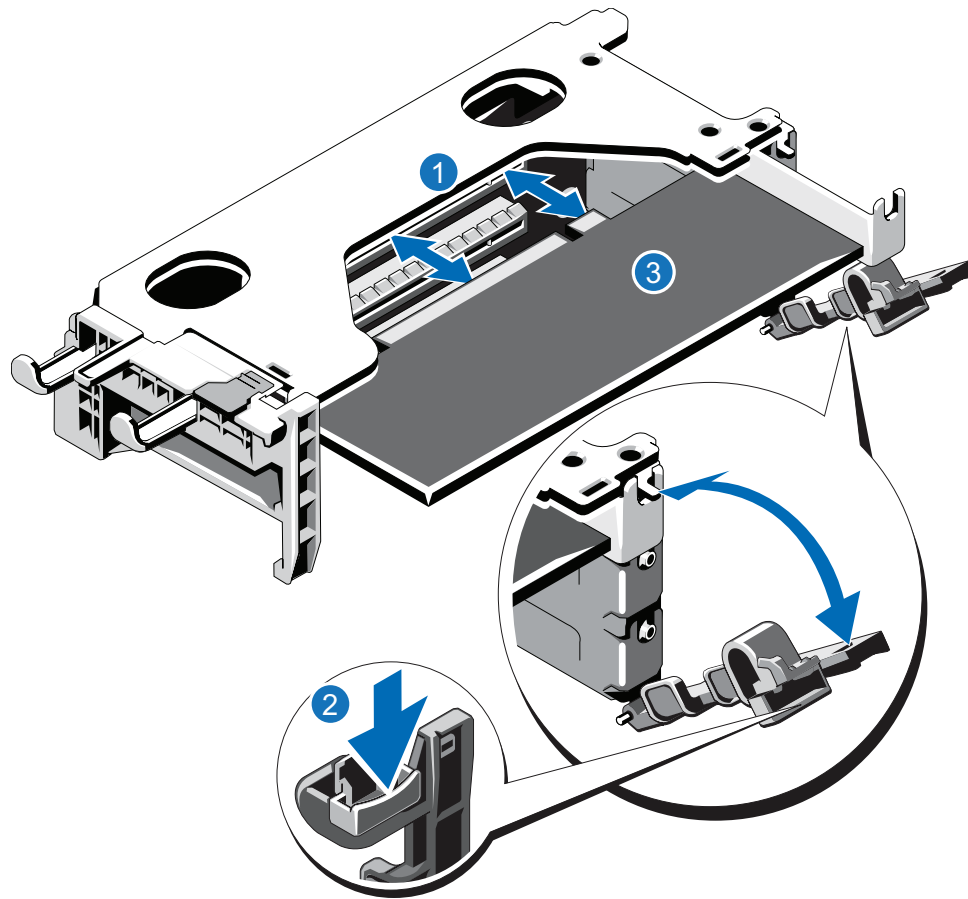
Removing and Installing the Expansion Card Riser 1
